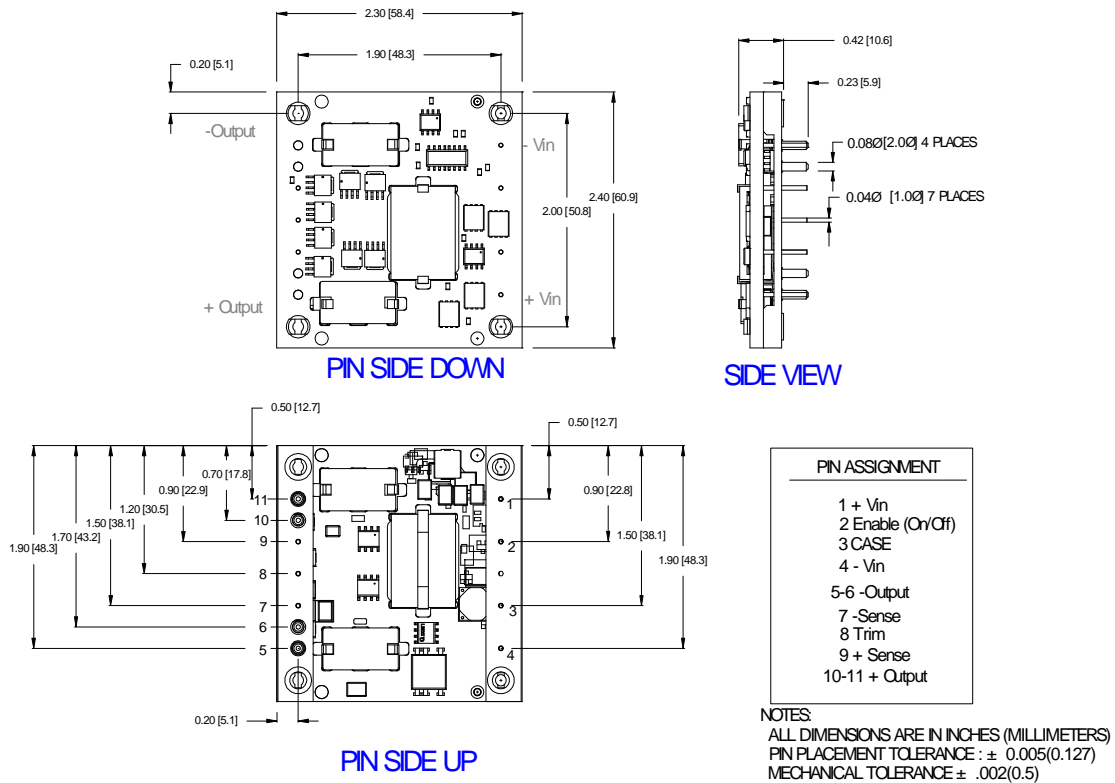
ALH80 Series (Open Frame) Mechanical Outline Drawing.
